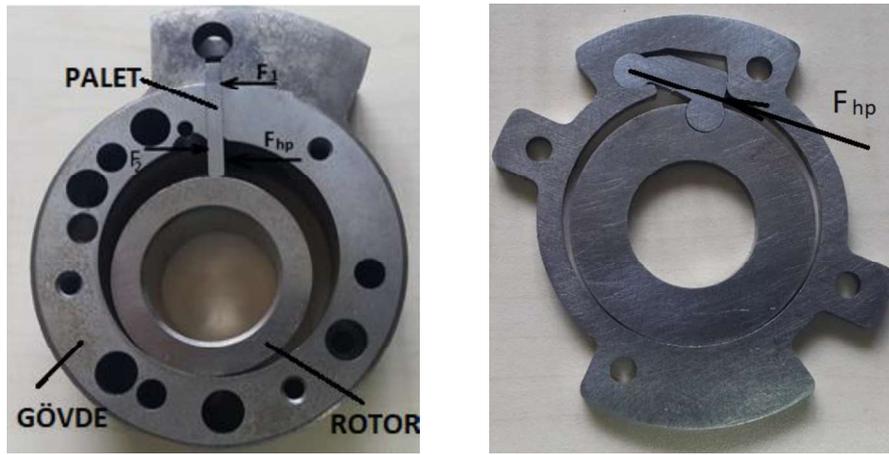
Classical and Novel vane Designed Compressor Body, Rotor, and Palet
